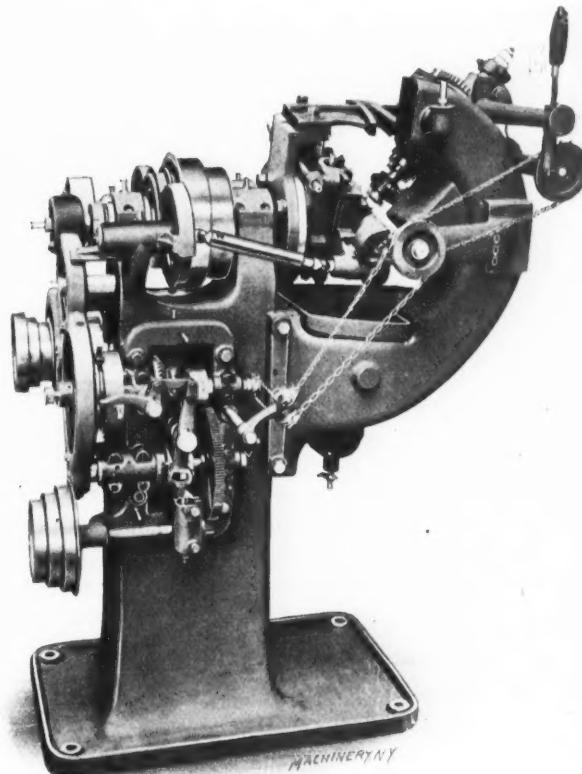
The Warren Bevel Gear Generating Machine as built by Ludwig Loewe & Co., Berlin.
